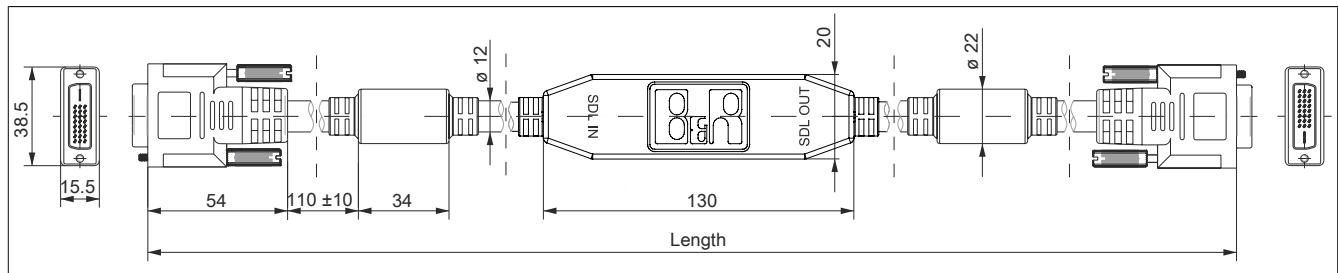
5CASDL.xxxx-13 ≥Rev. E0 - Dimensions
